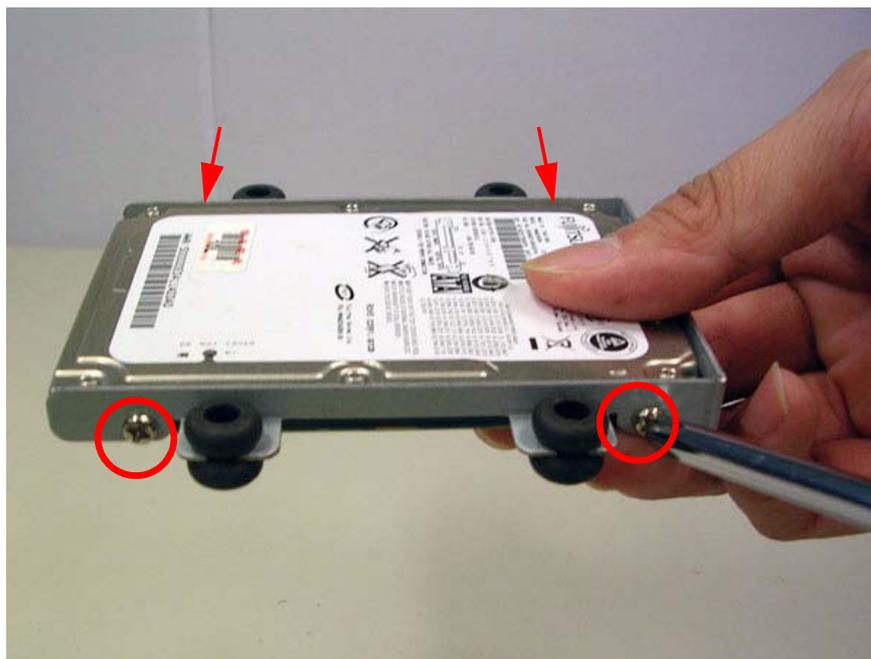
Assemble HDD and HDD frame by 4 Screws
